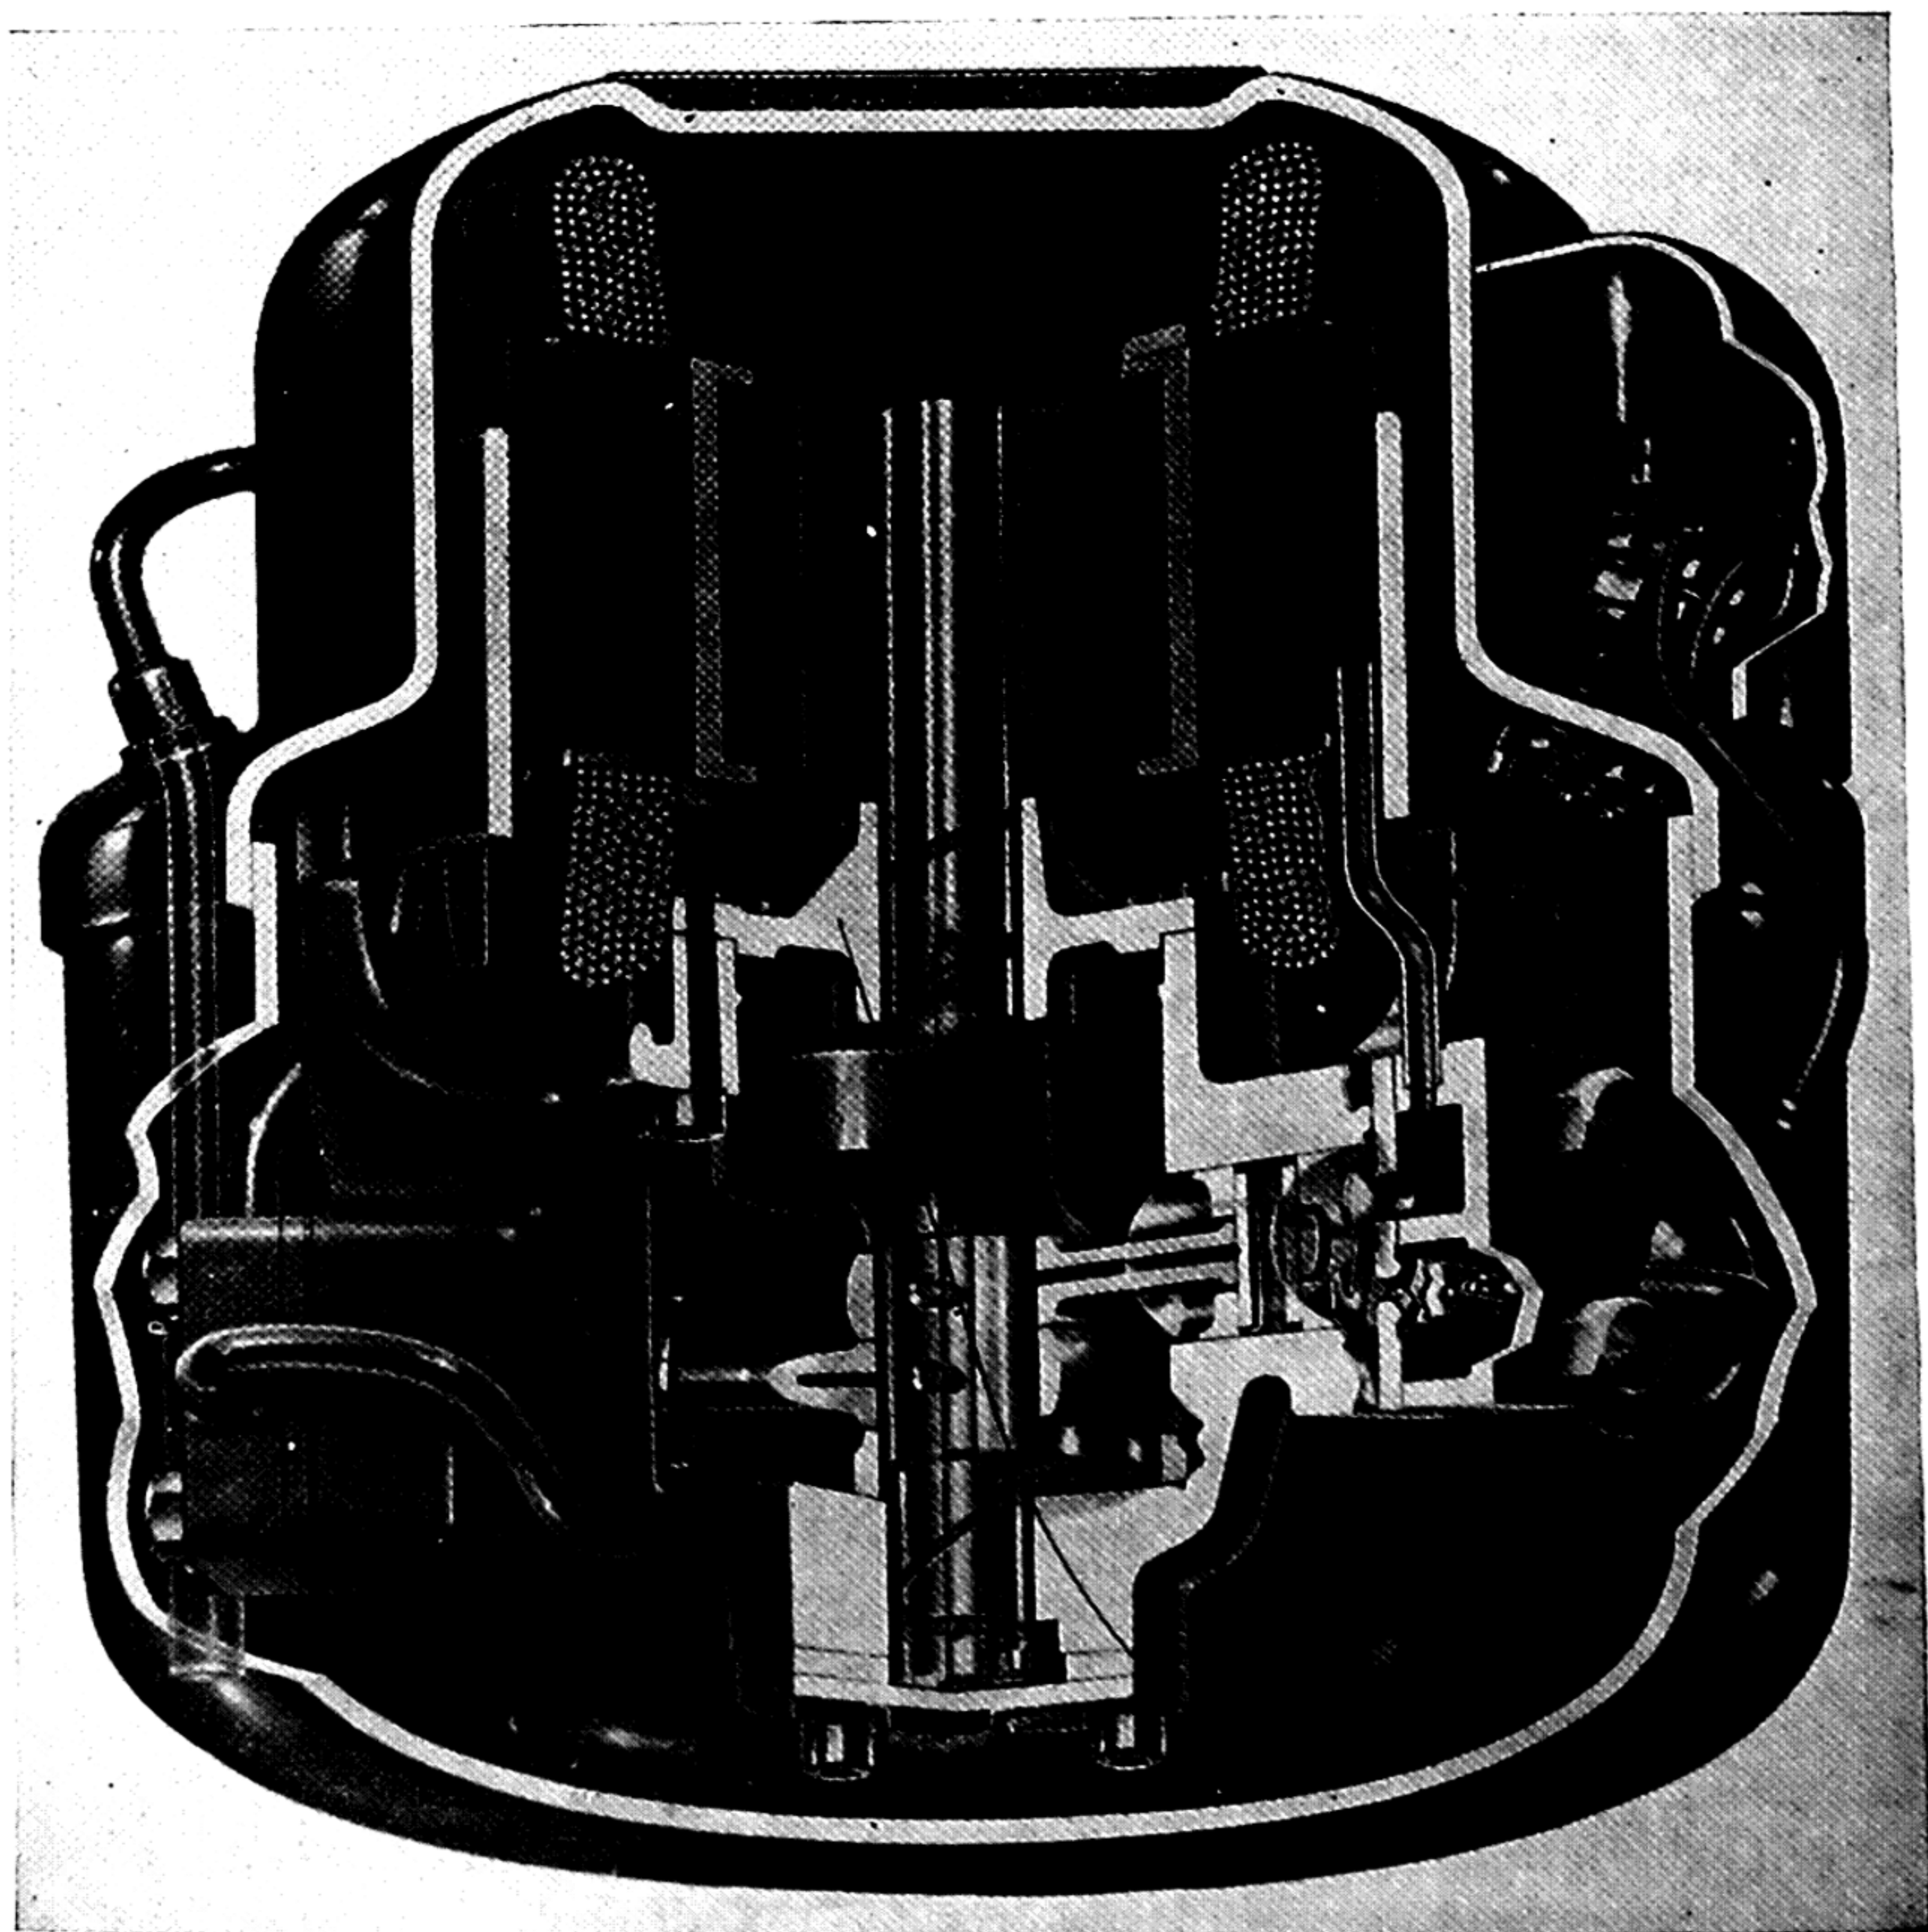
Hermetic reciprocating compressor. Courtesy Universal Cooler Division, International Detrola Corp.
